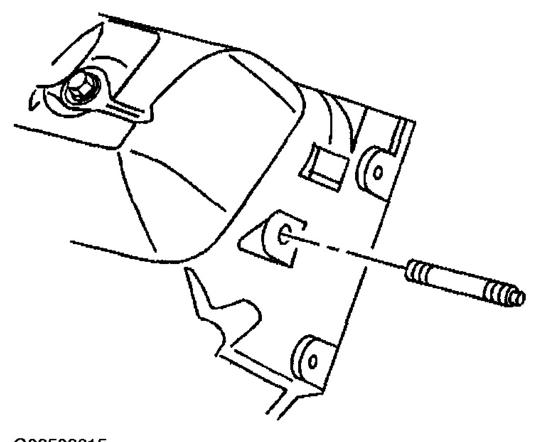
Removing Spark Plug Wire Harness Support Courtesy of GENERAL MOTORS CORP.
